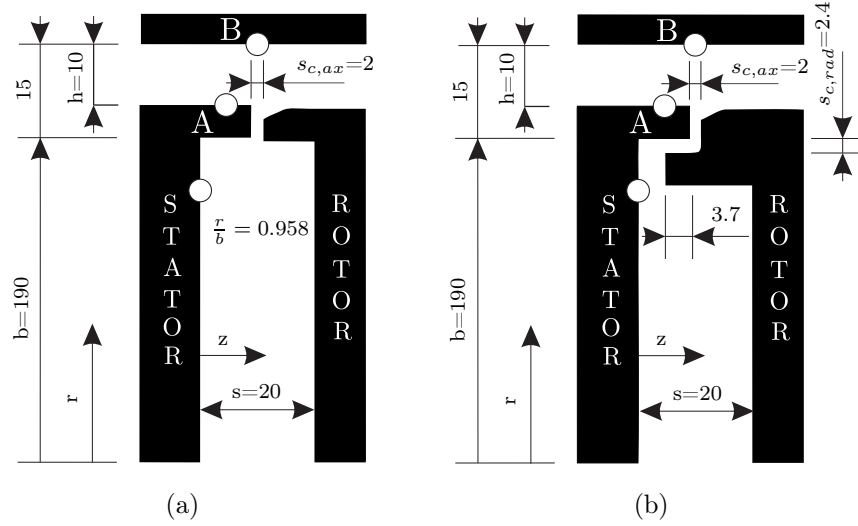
Generic dimensions (mm) and measurement locations for; (a) axial-clearance seal; (b) radial-clearance seal
